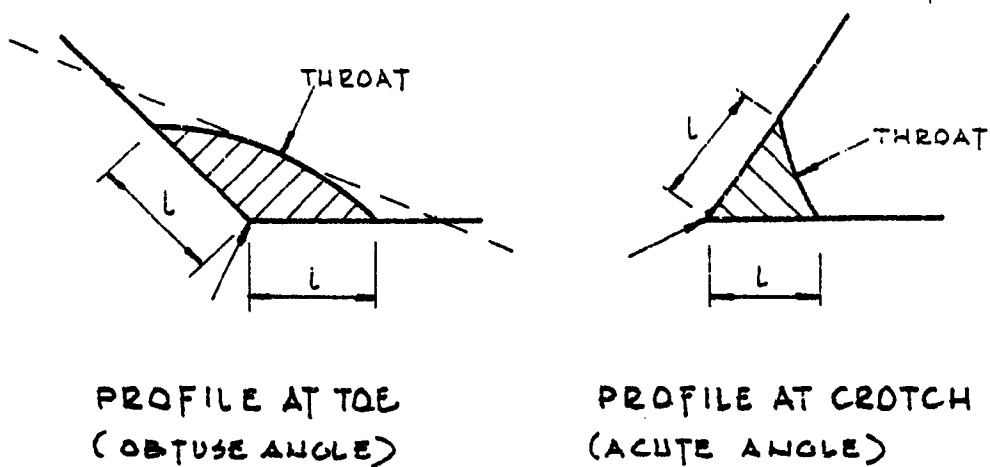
Fillet welds at acute and obtuse angles.
